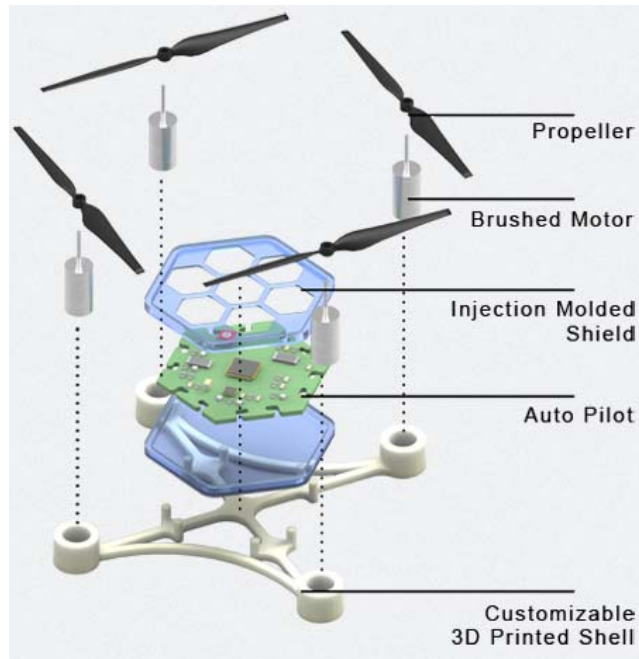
Build a simplified drone model using 3D printing and injection molding [170]
